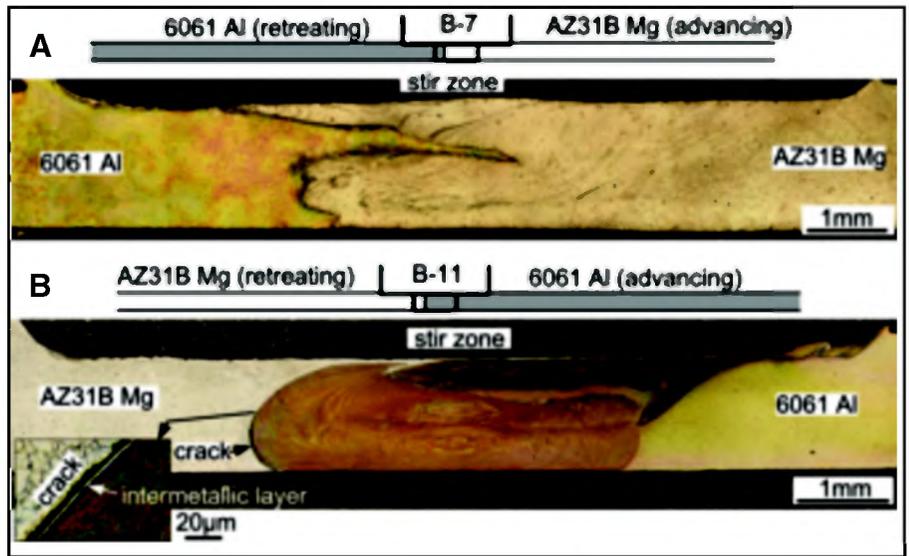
Transverse cross sections of welds in butt joints. A — Weld B-7; B — weld B-11.
